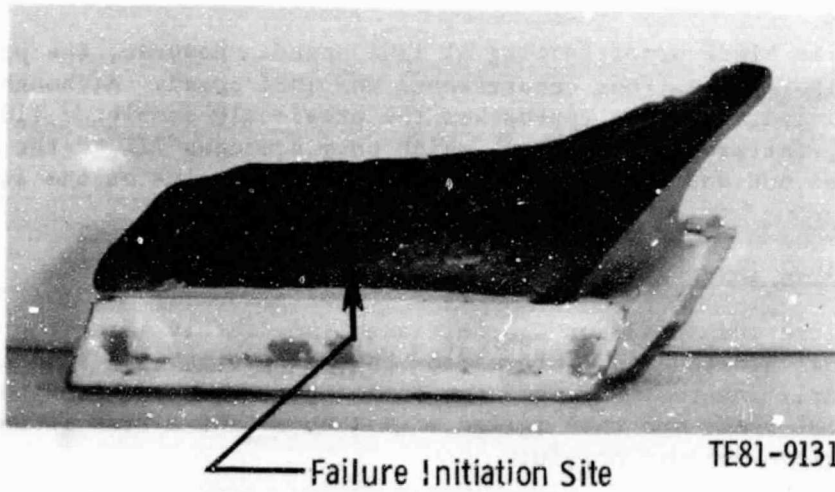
Ceramic blade failure, rotor assembly spin test.
